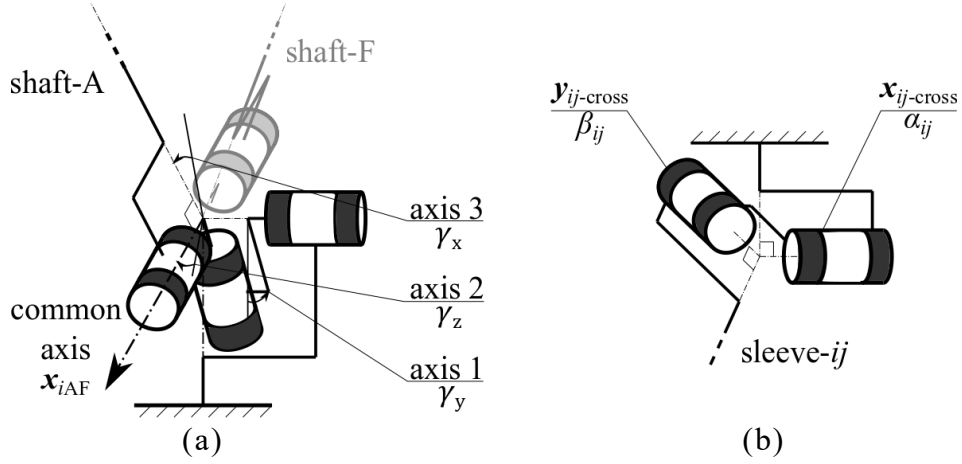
Geometric definitions of (a) double Cardan joints on foot platform and (b) Cardan joints on hip platform.
